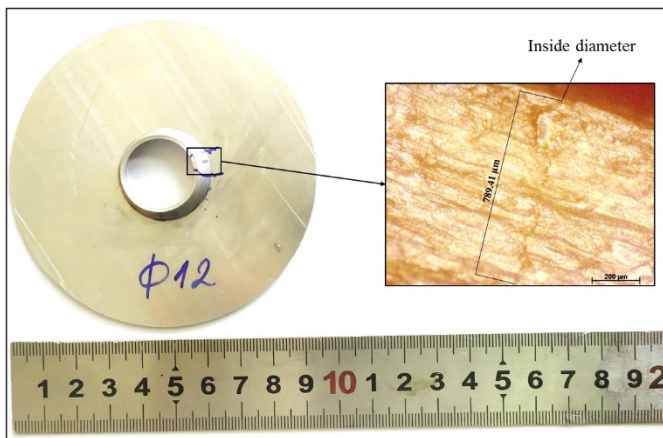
Hole-Flanging Part for the Blank with an Initial Diameter of 12mm
